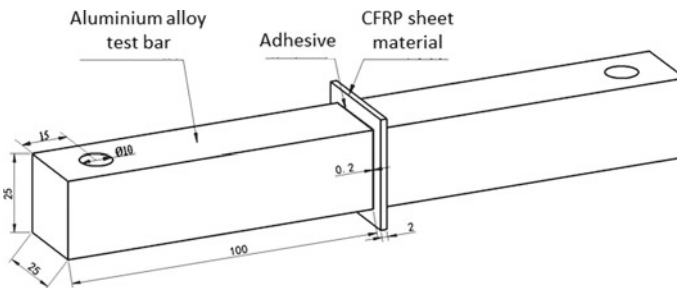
Geometries and dimensions of joints (dimensions in mm)
